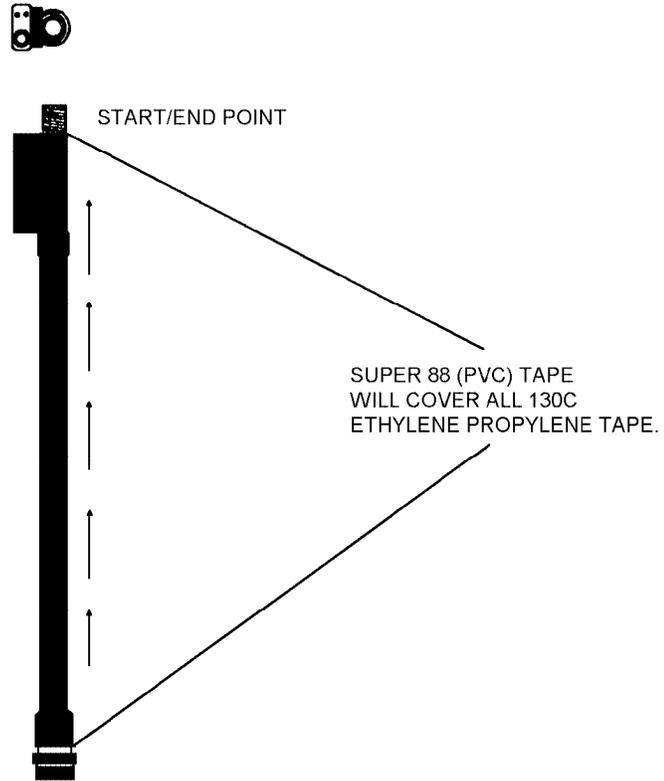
Unmodified Regulator to Seat Kit Hose Assembly Taping
